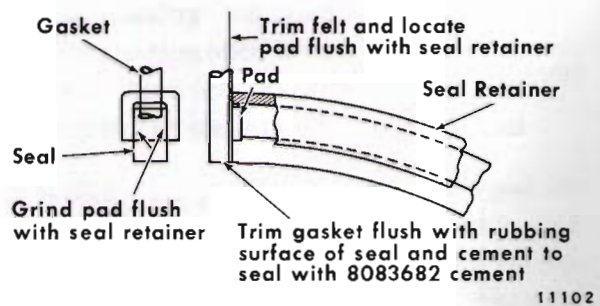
Wheel Side - Axle Bore Seal Retainers
